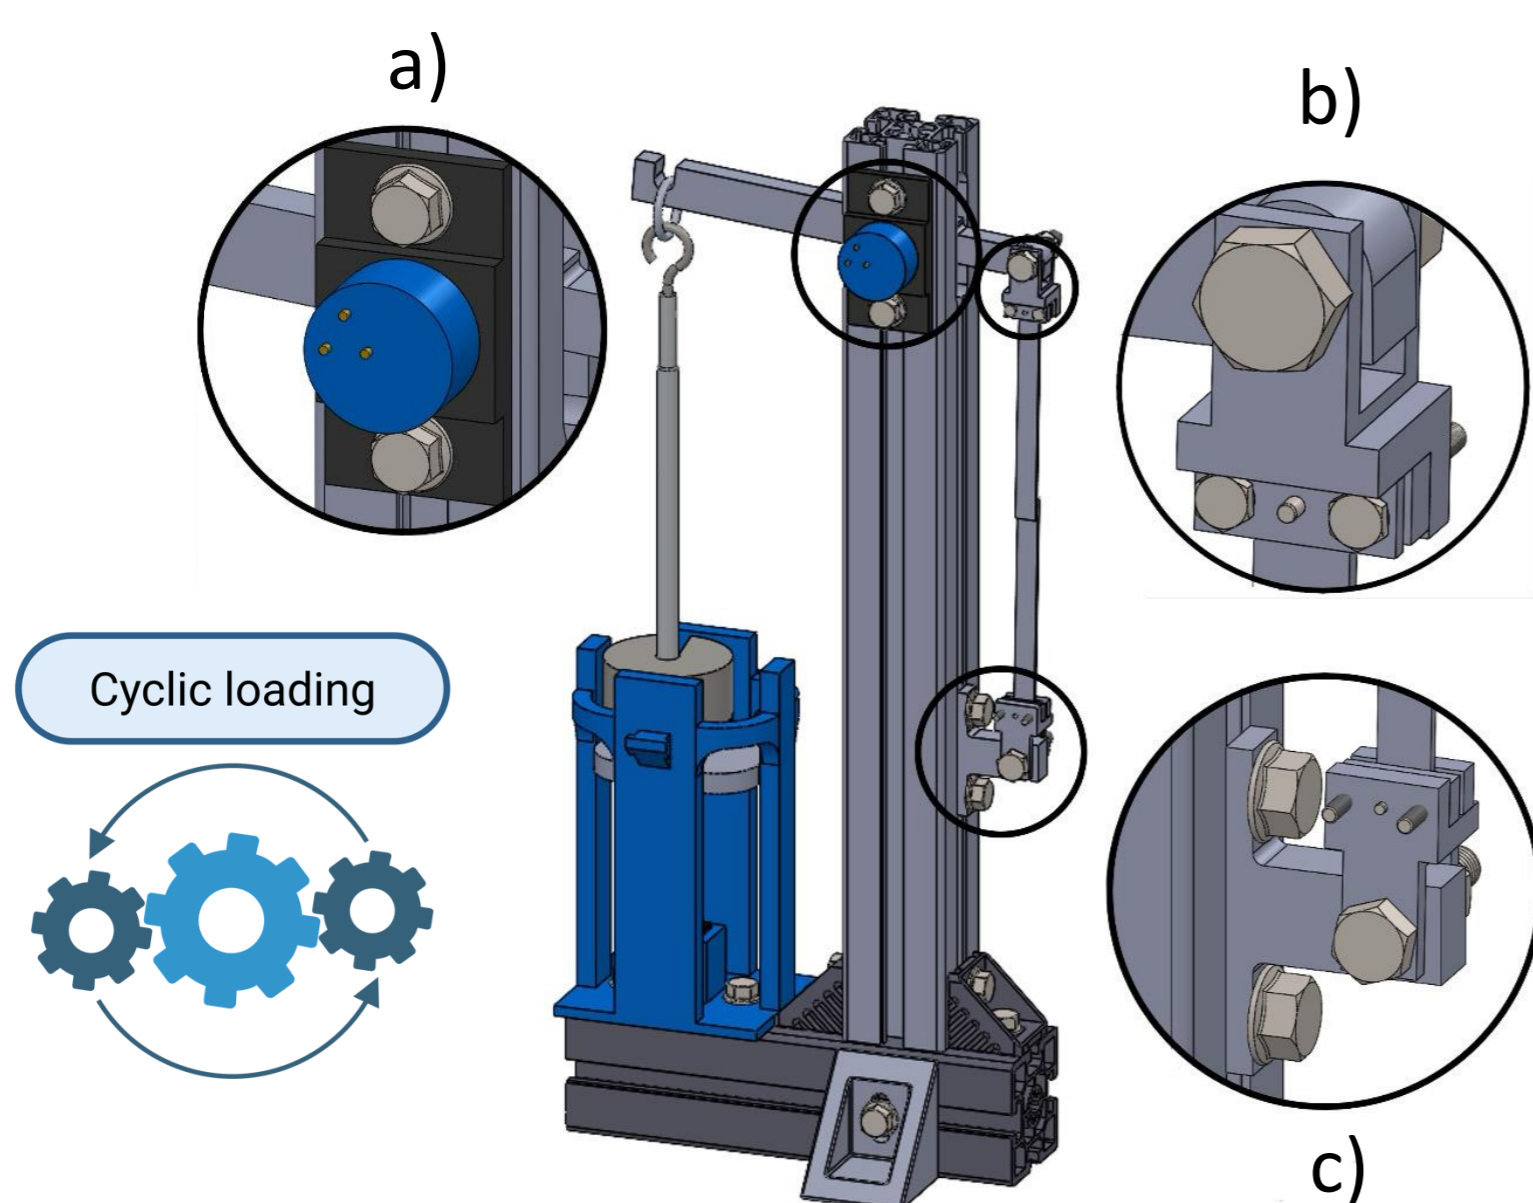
CAD model of the cyclic creep testing machine: a) potentiometer and lever assembly for load application; b) upper specimen grip; c) lower specimen grip.
